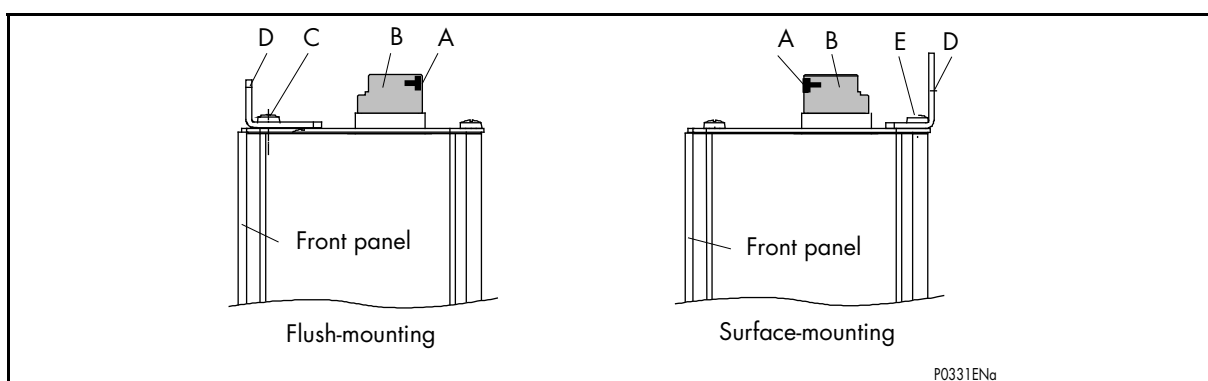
FITTING MOUNTING BRACKETS AND REMOVABLE TERMINAL BLOCKS
